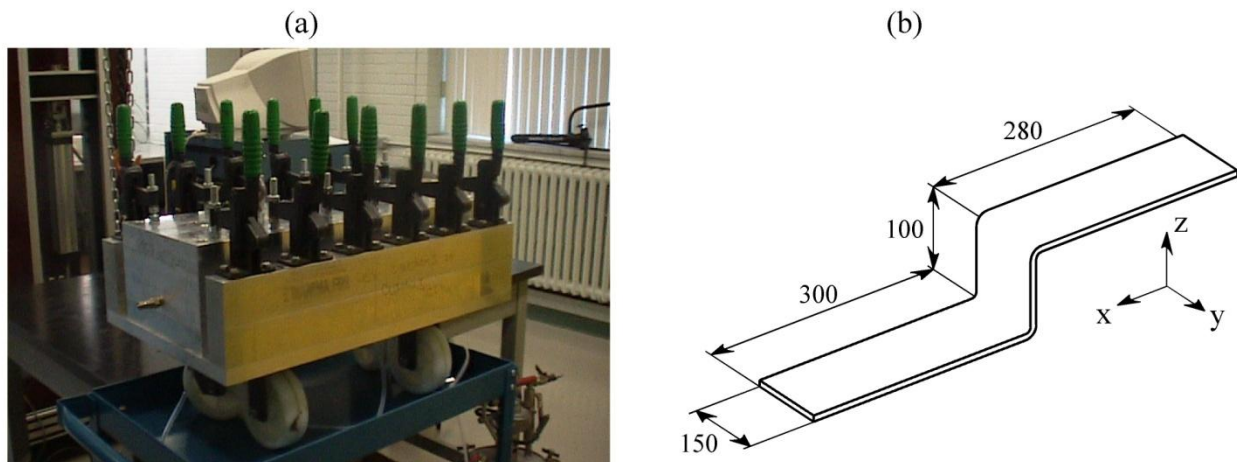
Implementation of flexible injection process for curved parts: (a) experimental aluminum mold; (b) geometry of the part (dimensions are in mm).
